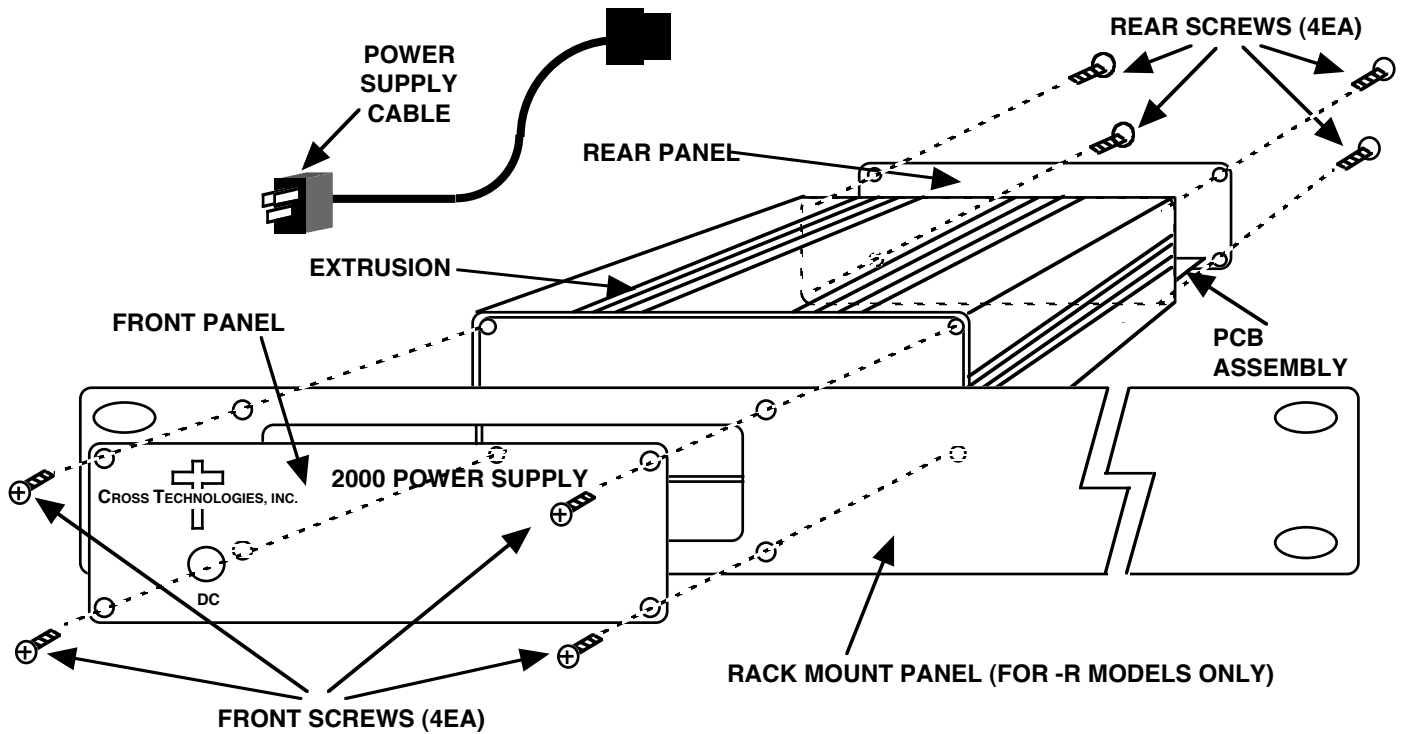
Mechanical Assembly (Rack Mounting)
